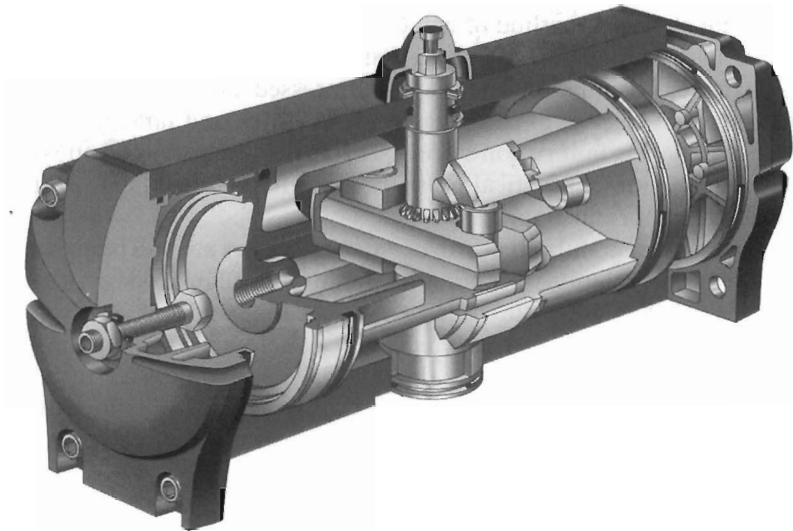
Double-acting pneumatic actuator with scotch yoke drive.
